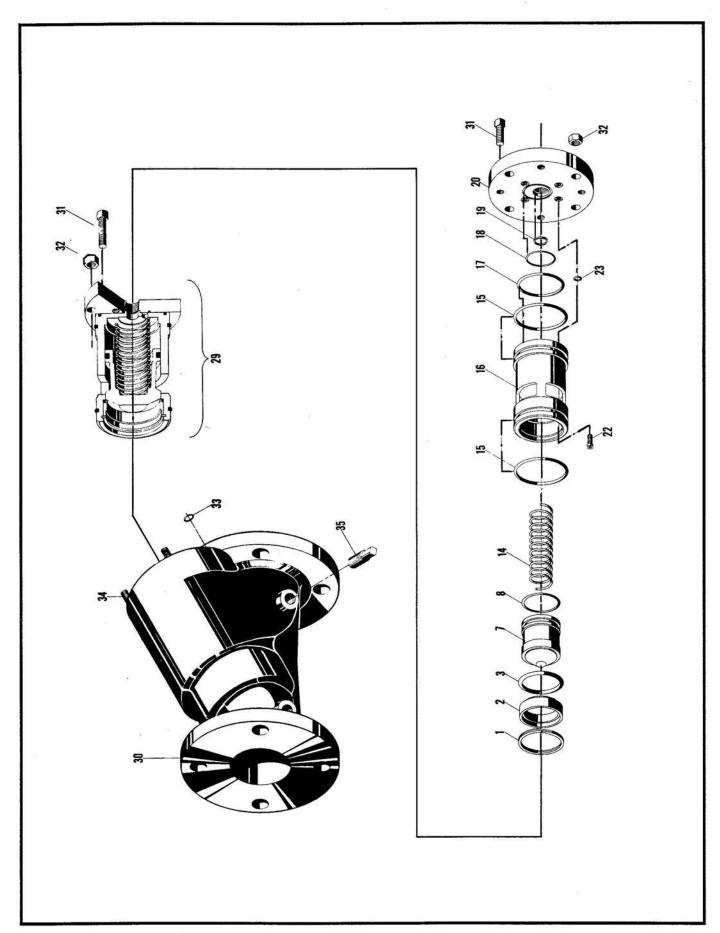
Parts Drawing - Series 700A Control Valves Without Position Indicator
